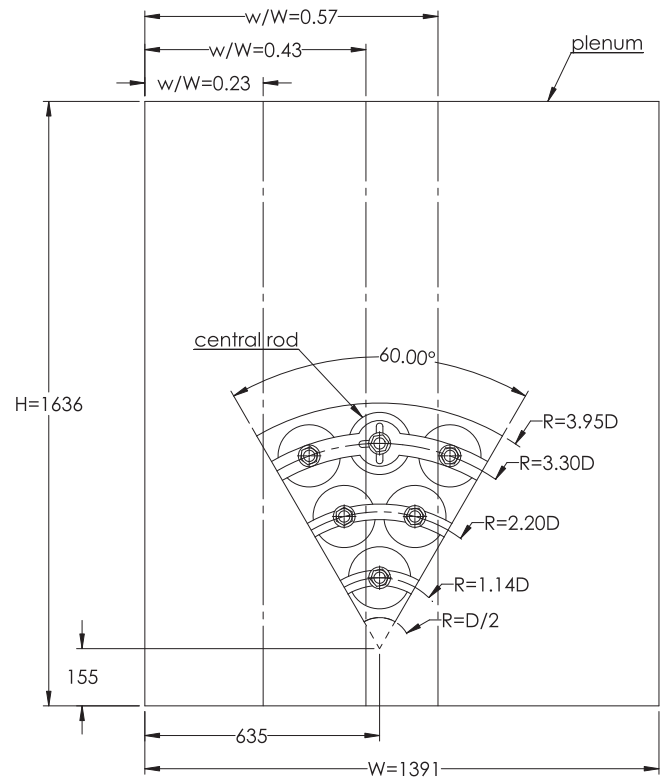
Test section inlet with endplate viewed from the plenum interior; dimensions are in mm and the rod diameter is $D = 168.3\ \text{mm}$.
